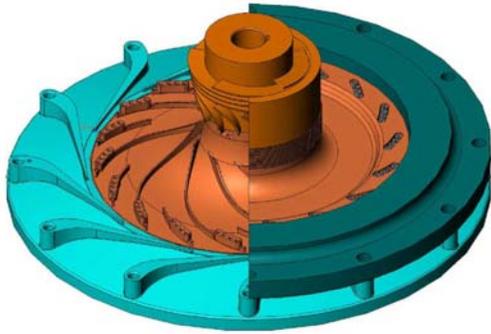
(a): Solid model of hydraulic assembly with cut-away
